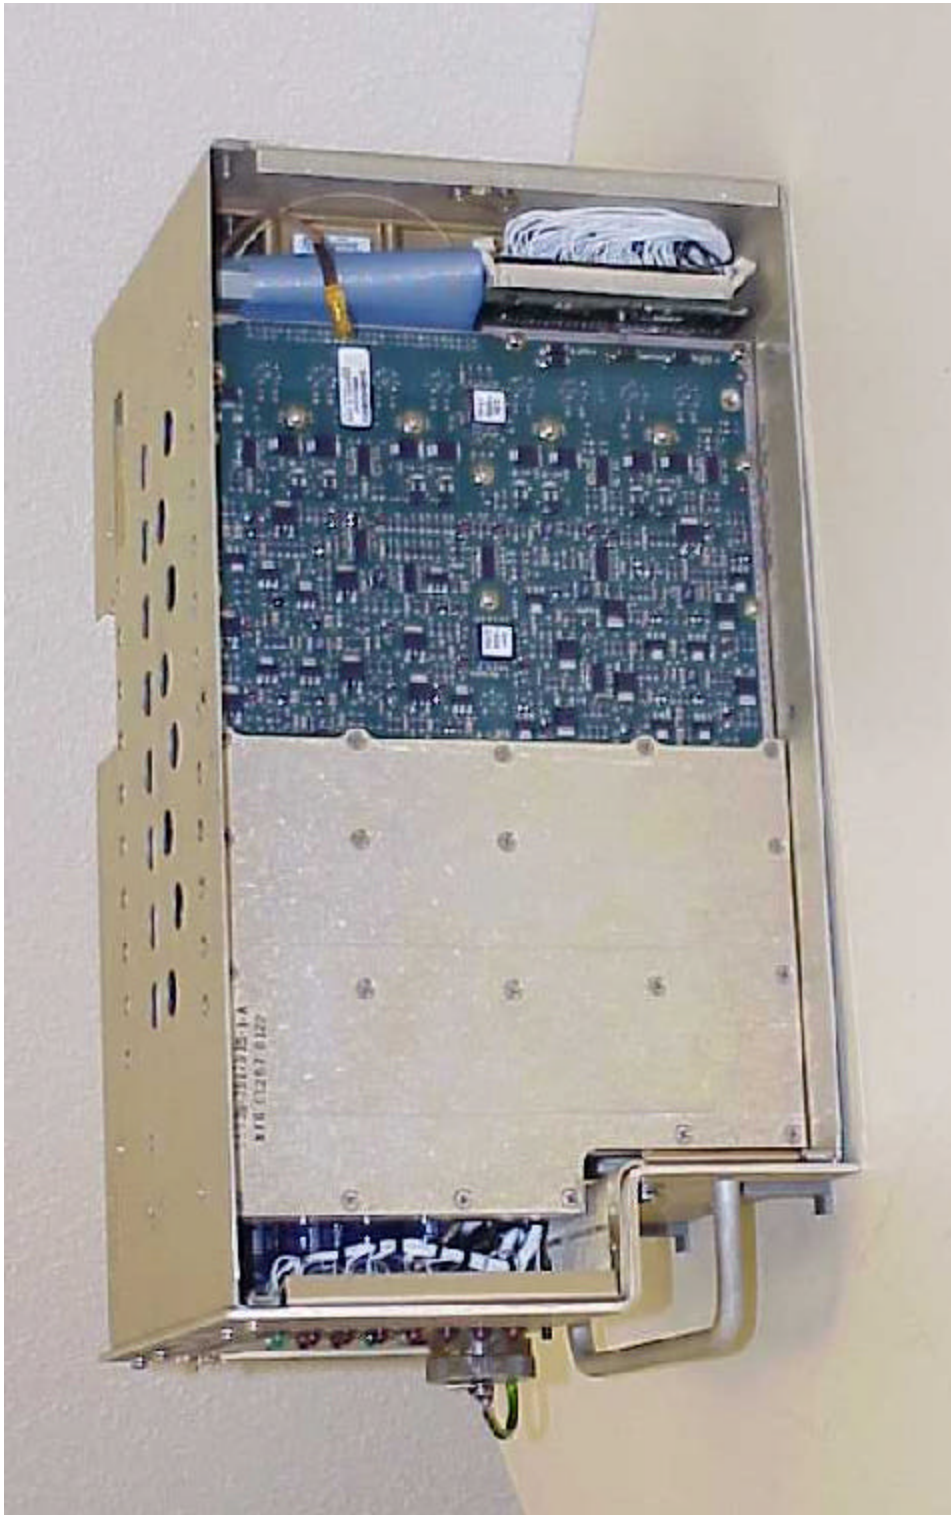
View of Unit Side With A7 TAWS Processor Showing
